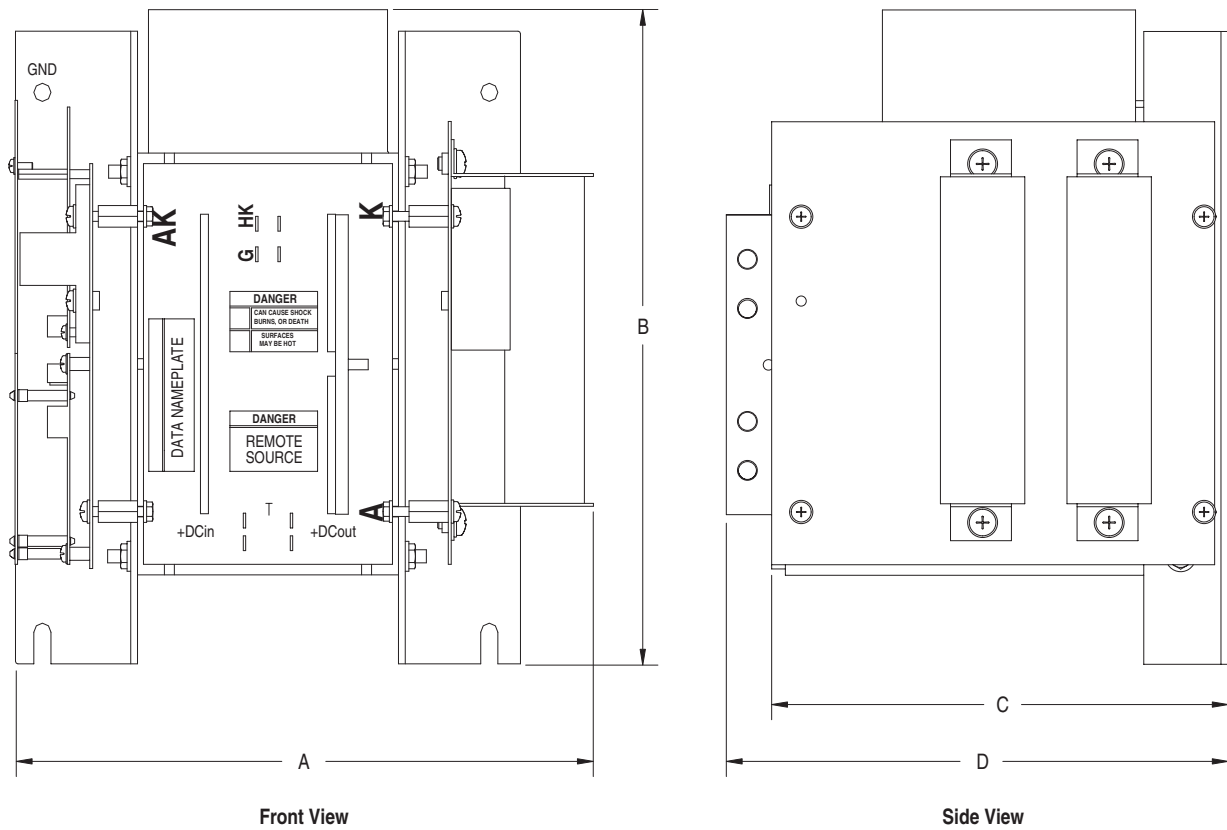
DC SCR Precharge Module Panel Mounting Dimensions
